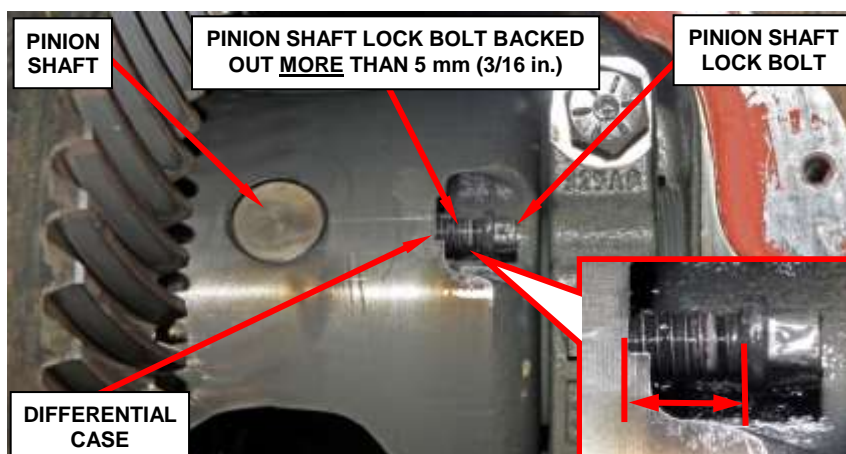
Pinion Shaft Lock Bolt Backed Out More Than 5 mm (3/16 in.)
